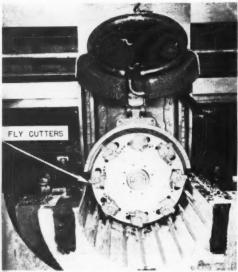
Milling head in cutting position showing grooves in a half-bearing, and the facing plate equipped with carbide tipped fly cutters.
